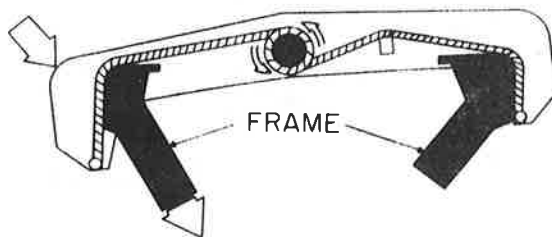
STEEL CABLE BUMPER DECELERATOR
